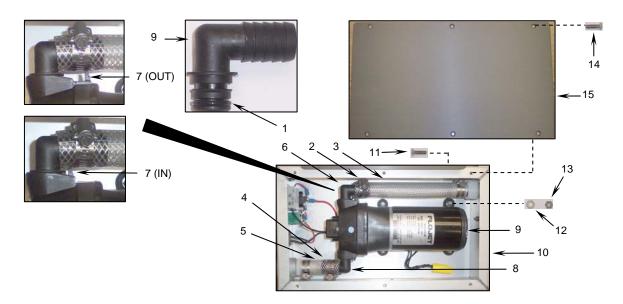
Installing the Sink Fill Pump Assembly Quick Disconnect Elbows.
